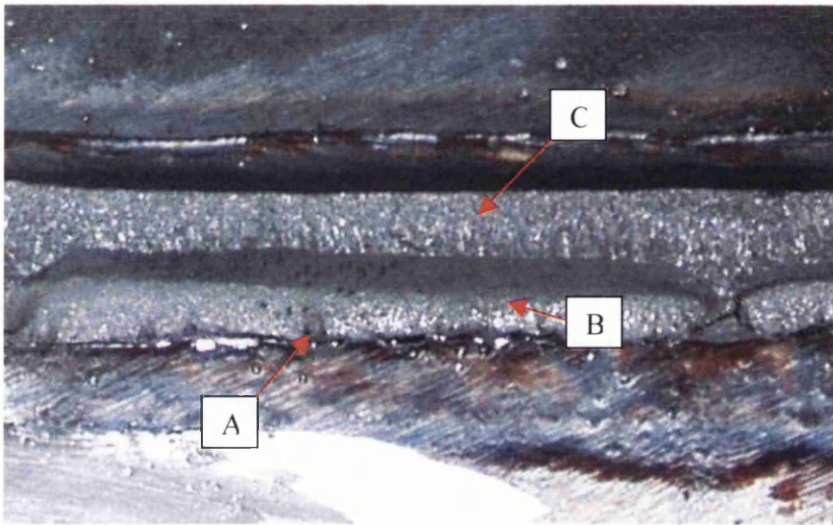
Tee joint coupon - crack initiation location at weld throat
